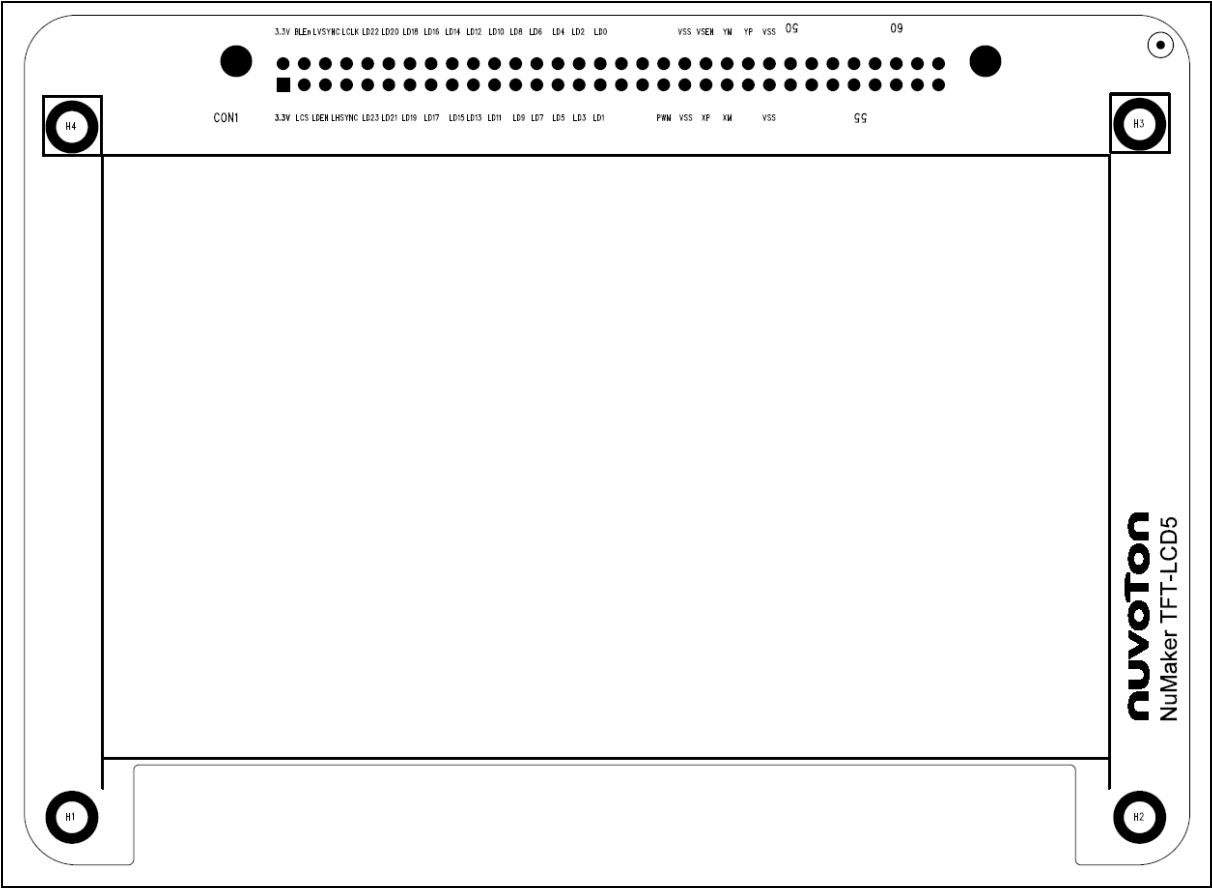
Front Placement of NuMaker TFT-LCD5 Board
